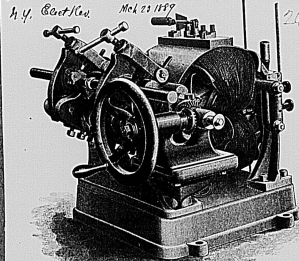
TRANSFORMER OR WELDING COIL OF THE THOMSON ELECTRIC WELDING CO.
